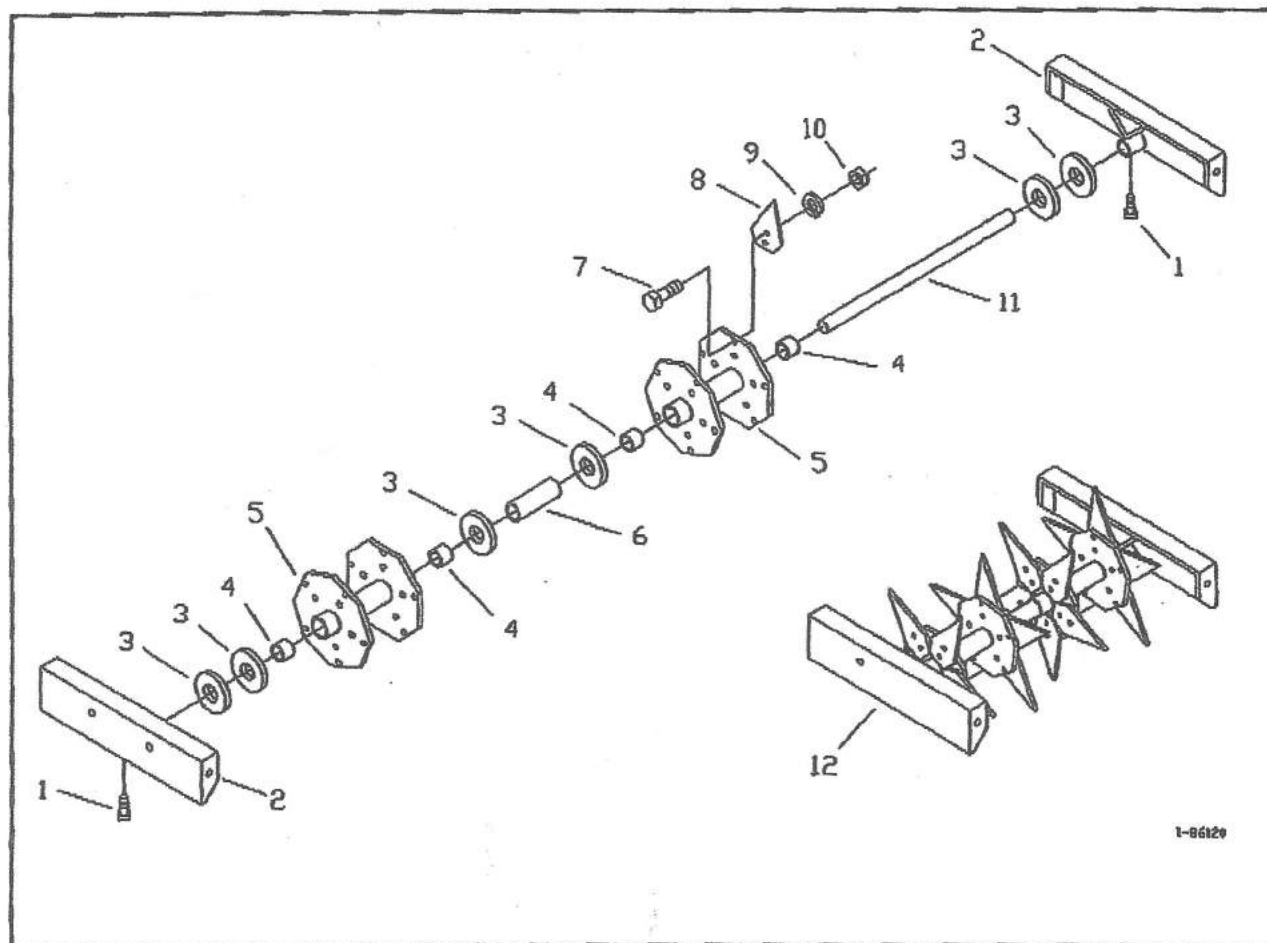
Economy Aerator Slicing Blades Parts Detail
